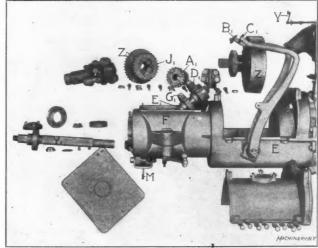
Clutch and Transmission Gear Members Dismantled to show Construction
